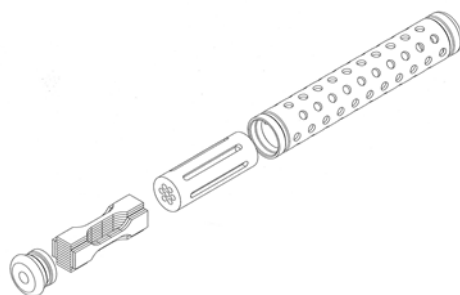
Exploded view of the perforated capsule with tensile samples. For scale, the tensile samples are 25.4 mm long.
